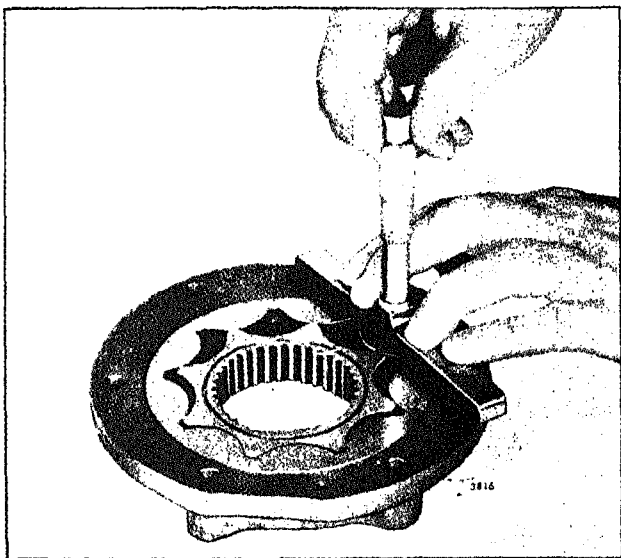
Measuring Clearance from Face of Pump Body to Side of Rotor
